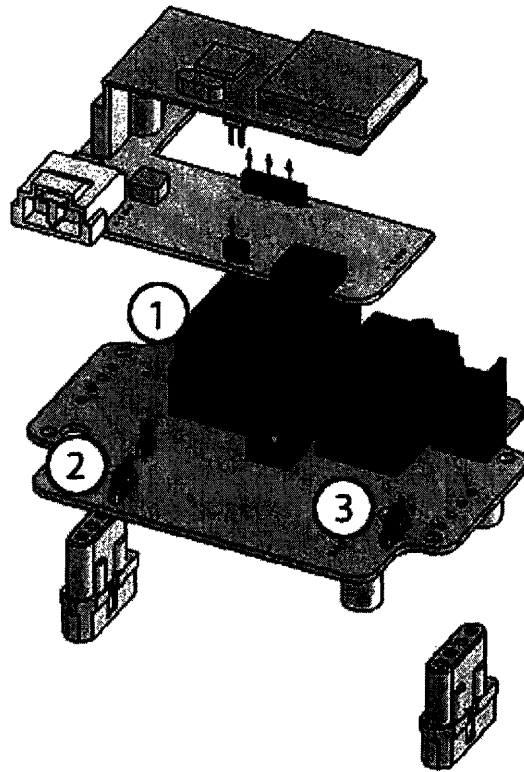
Header locations where the adaptor PCB soldered onto the main PCB.
